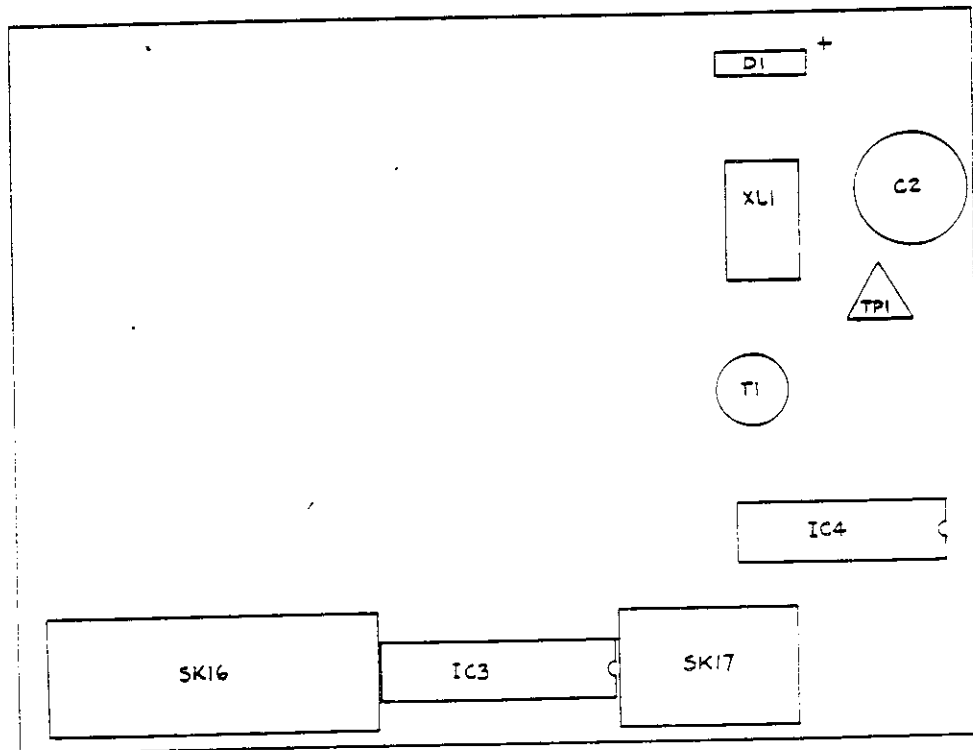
Component Layout, BNC Mounting Board (19-1206)
